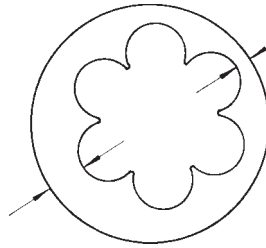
Thinnest and Thickest Wall of a Cross Section When the Insulation is Below the Conductor Surface
